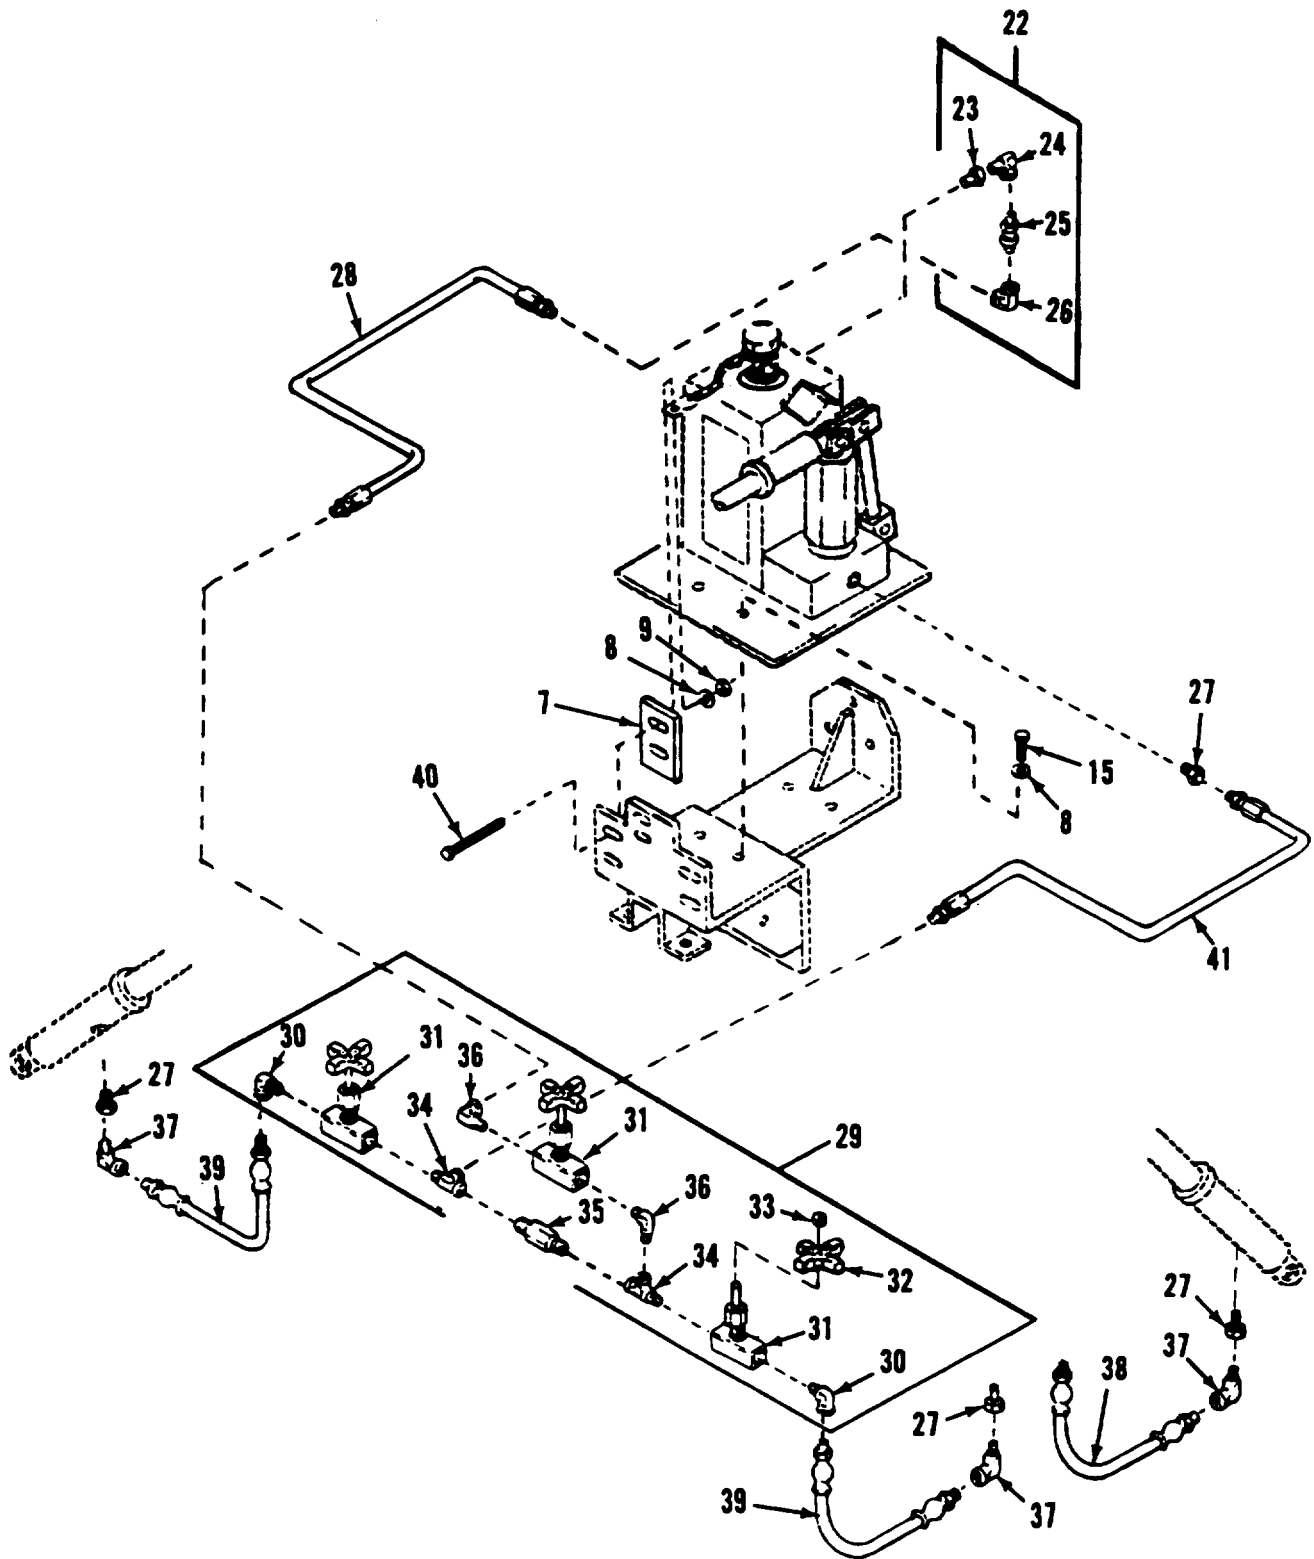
HYDRAULIC SYSTEM COMPONENTS (IMPROVED PUMP, M832 SN J089-001 THRU 159 AND J017-160 THRU 350 ONLY) (SHEET 3 OF 3).
